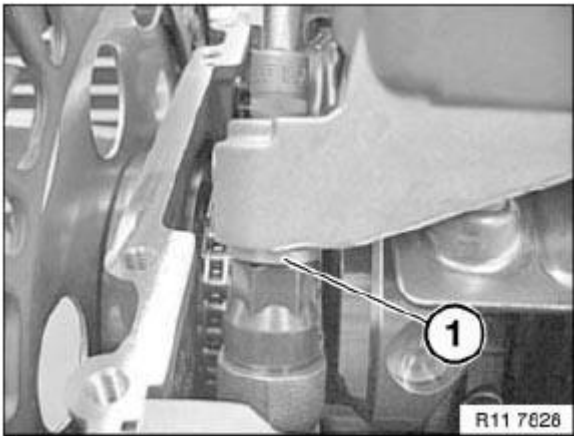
Identifying Oil Pump Adjusting Sleeve
